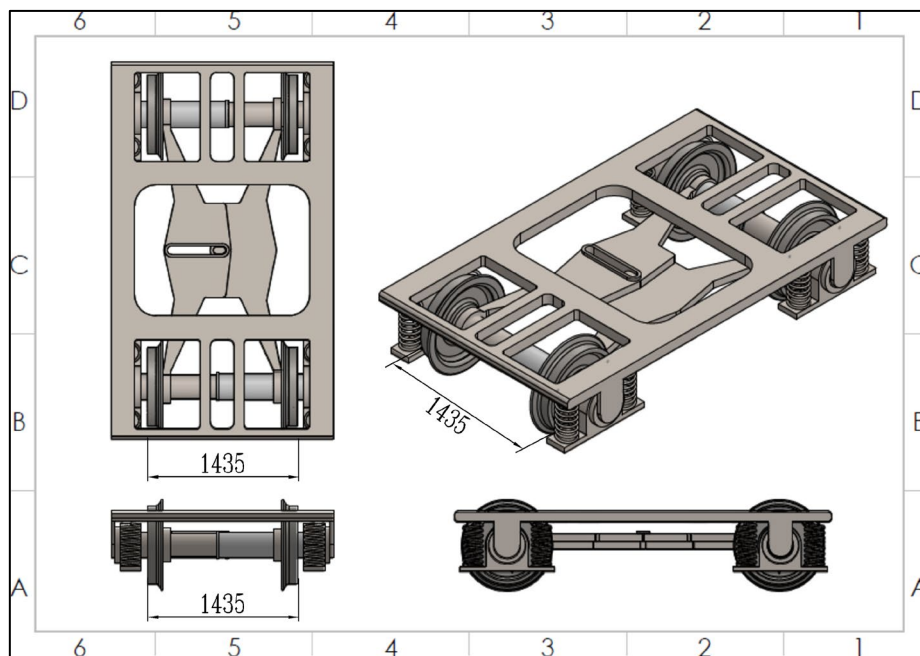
Complete setup of Gauge-Changing Bogie for Standard Gauge System
